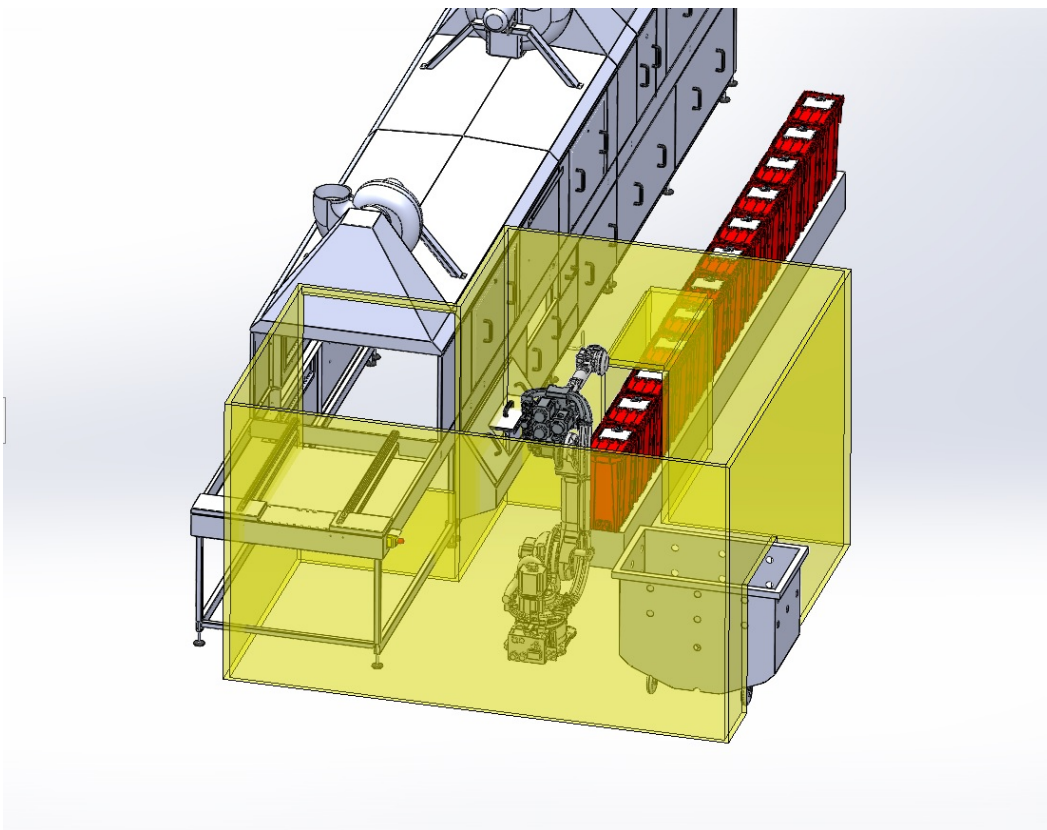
Concept layout shown for 10 and 17 gallon. Details not shown.
